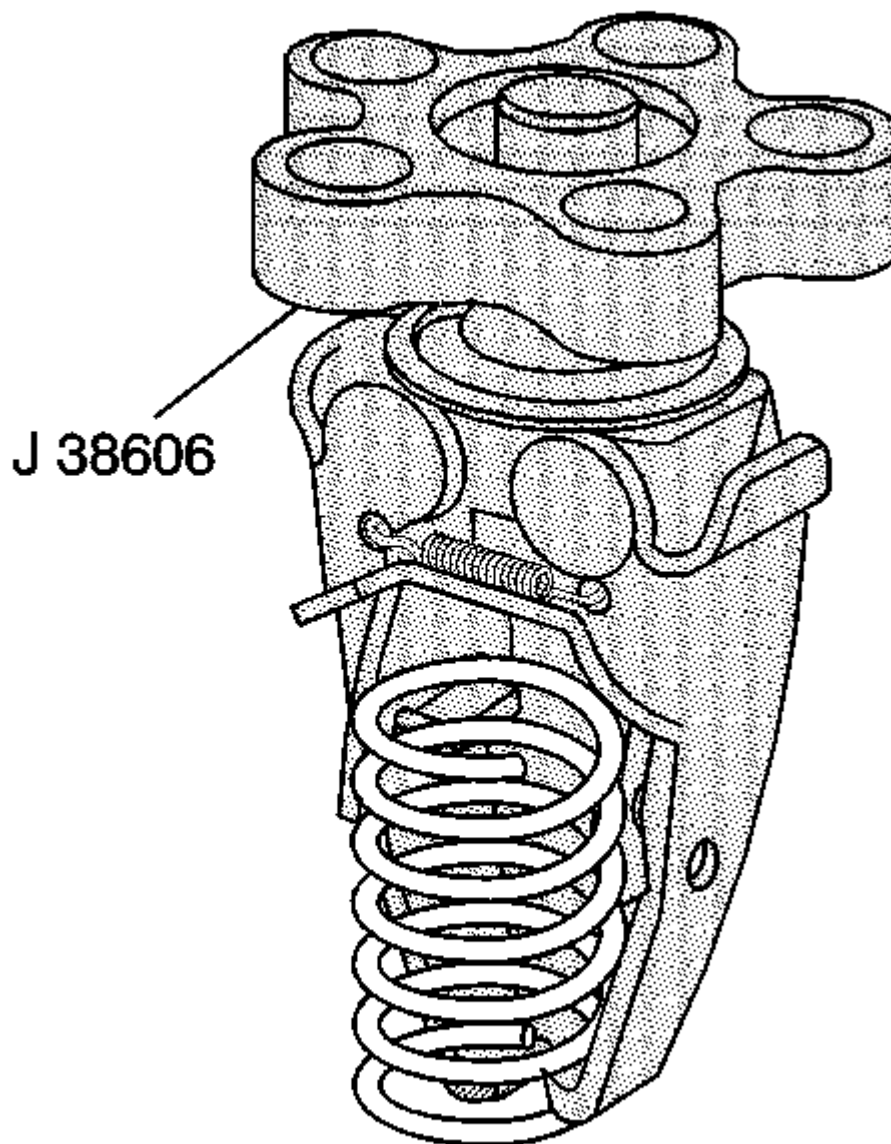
Installing Valve Spring & Valve Cap with J 38606
